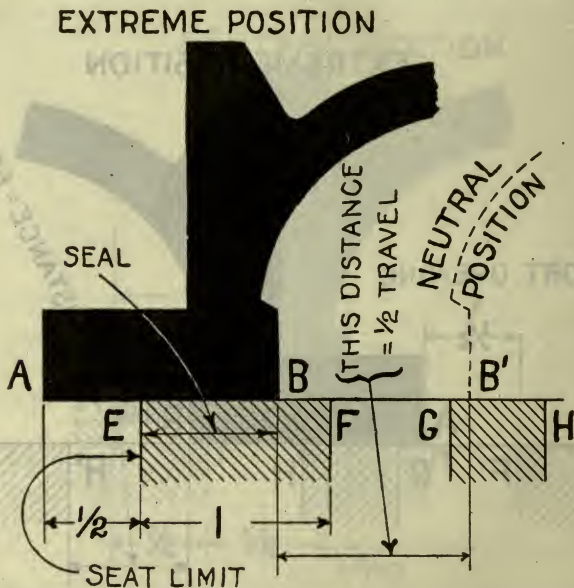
How to lay out the slide valve. III. The seat limit is obtained by sketching one end of the valve in extreme position for exhaust as shown and locating the seat limit E between A B, at some point which will give sufficient contact E B, for a tight joint, this distance being called the *seal*.
